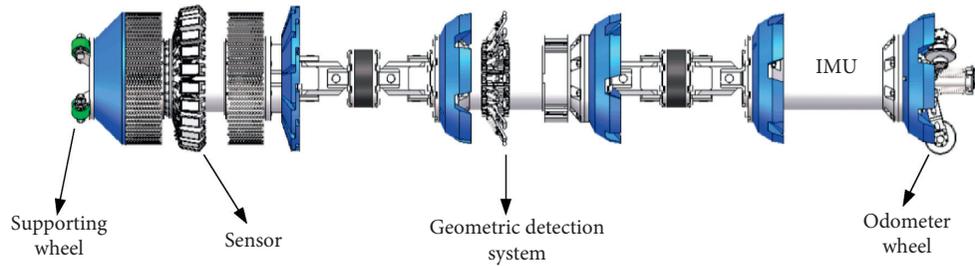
Inline inspection tool with IMU developed by Petrochina Pipeline Company.
